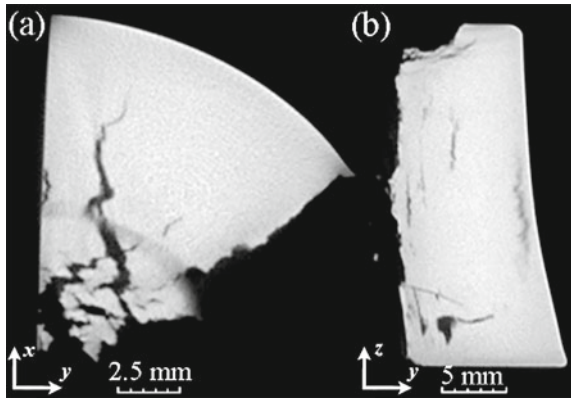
SEM—longitudinal fracture: fracture edge (a), fracture merging (b)
